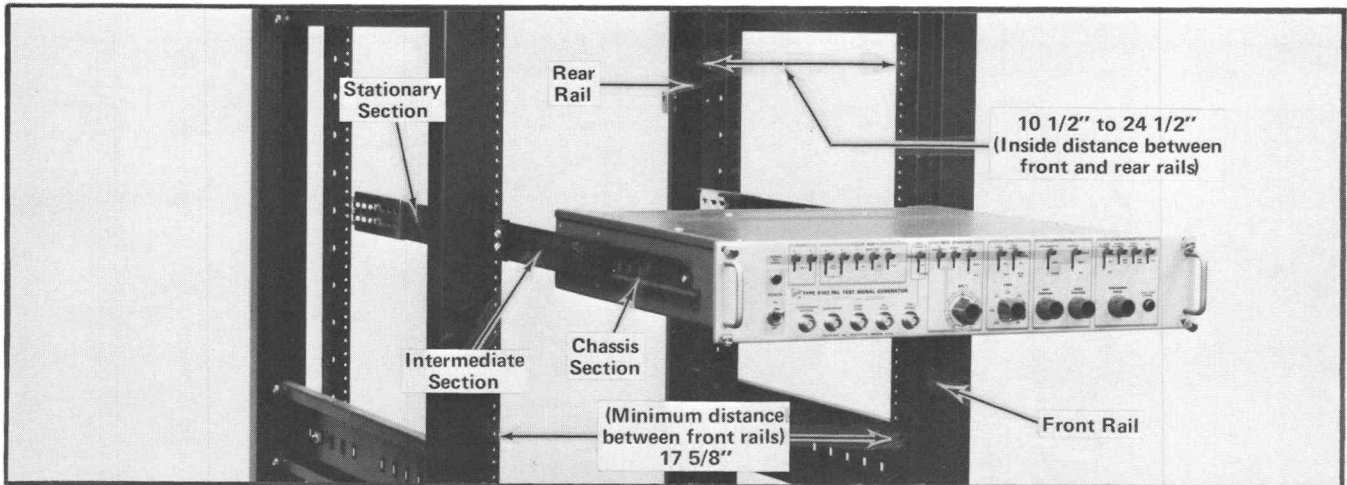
The Type R142 shown in the fully extended position. The cabinet rack sides have been removed from the rack to show mounting.
